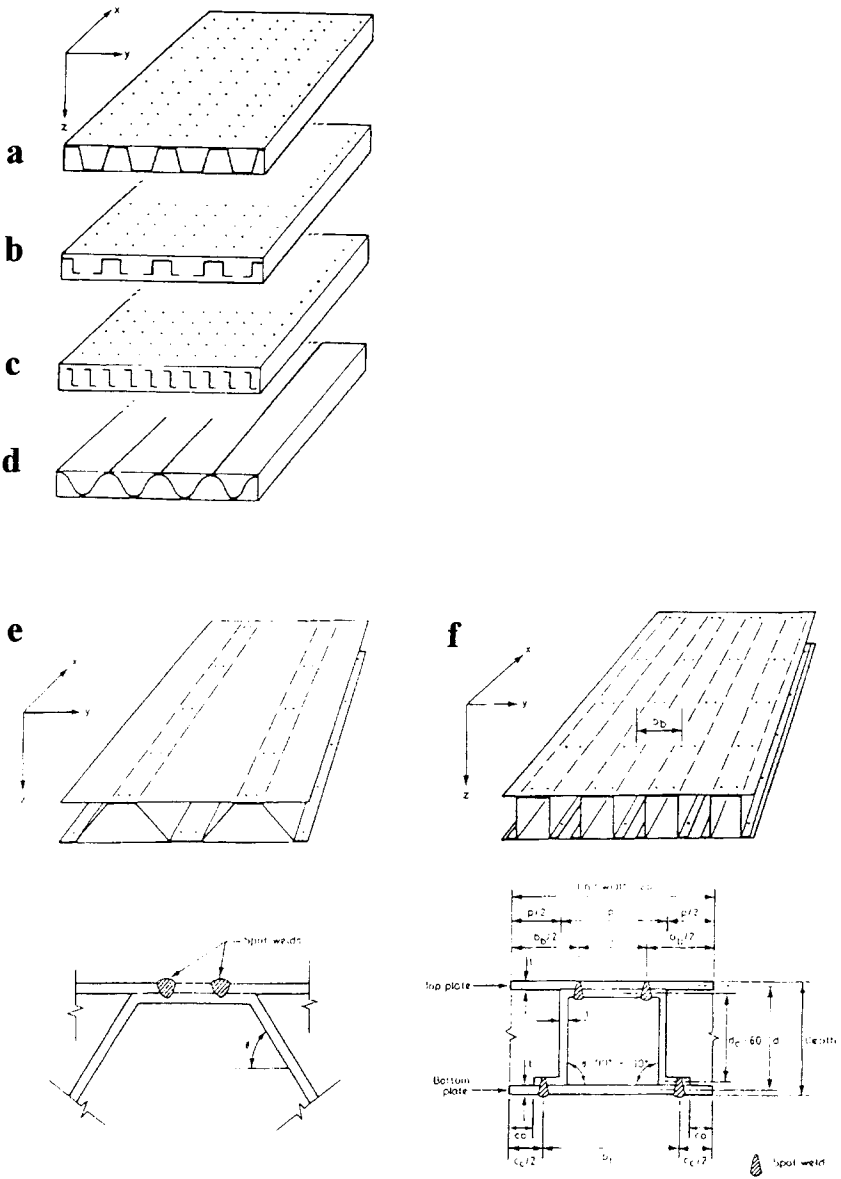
Examples of corrugated-core steel sandwich panels - a, b, c, d and details of welding - e, f, [4,7].
